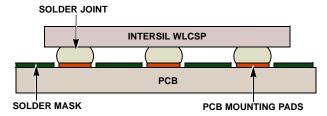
INTERSIL WLCSP MOUNTED TO A PCB BOARD
